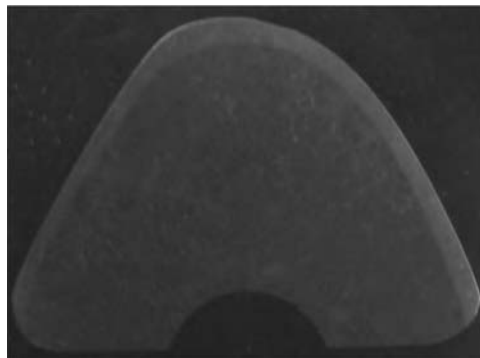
Cross section of camshaft lobe. Material is pearlitic gray cast iron. Courtesy of Sciaky, Inc.
